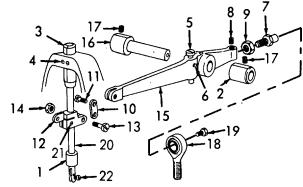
Needle Bar Drive Mechanism, Installation.
